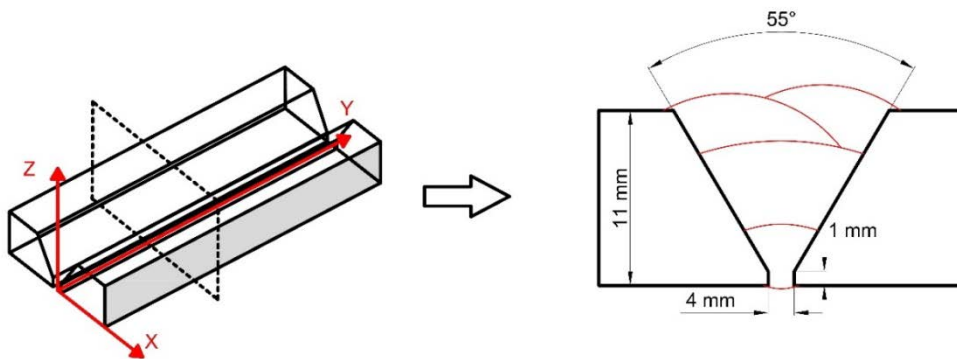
Armour steel Protac 500 welding scheme [1.3].
